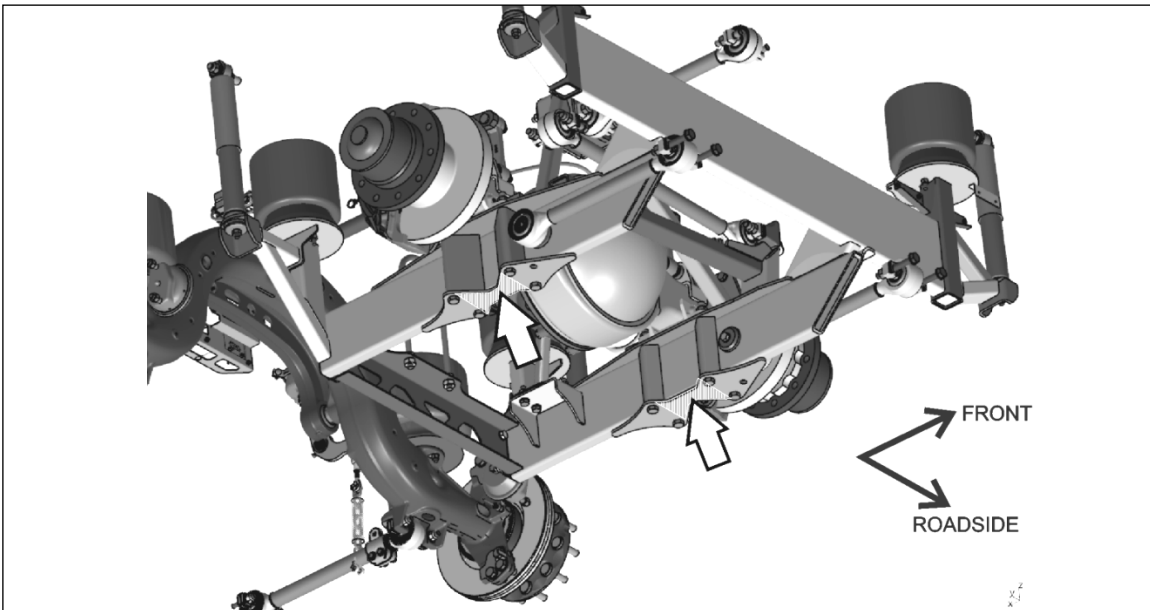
DRIVE AXLE SUB FRAME HOISTING POINTS.
